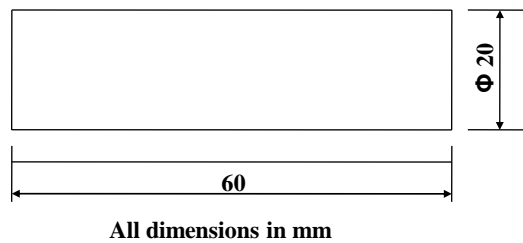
The dimensions of the mold cavity used to produce billets
